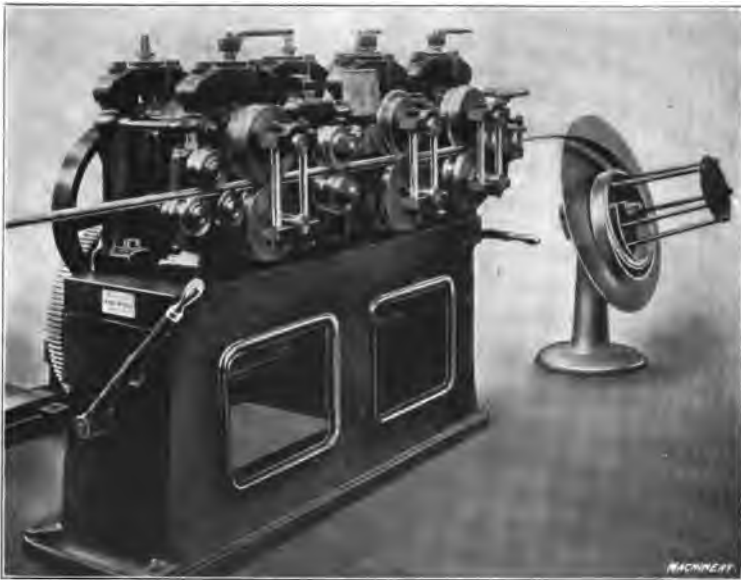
Tube Rolling Machine built by August Schmitz, Dusseldorf, Germany
